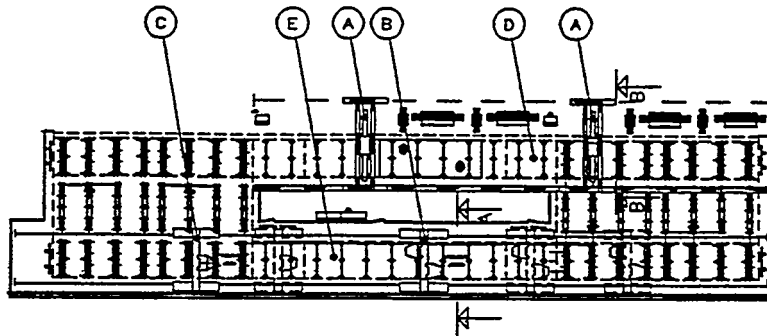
General arrangement of robotized web welding line, A: stiffner mounting gantry, B: double robot gantry, C: single robot gantry, D: tack welding area and E: robot welding area.
